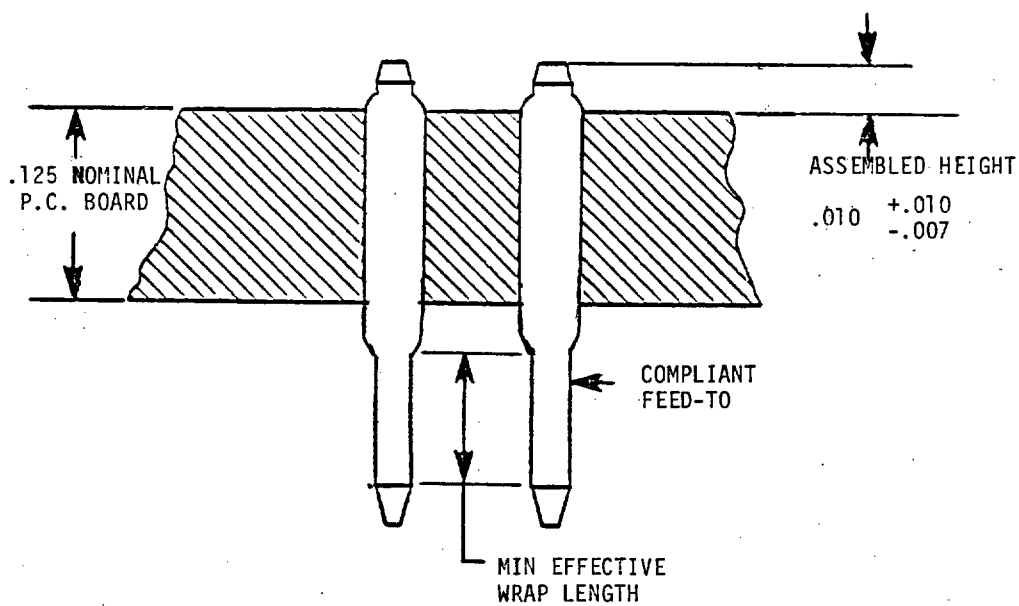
Cross-sectional view of printed-wiring electrical backplane assembly. - Continued.
